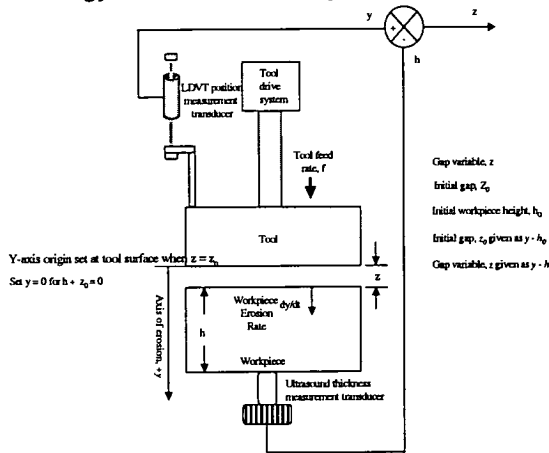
Tool and workpiece configuration and arrangement used for gap measurement
